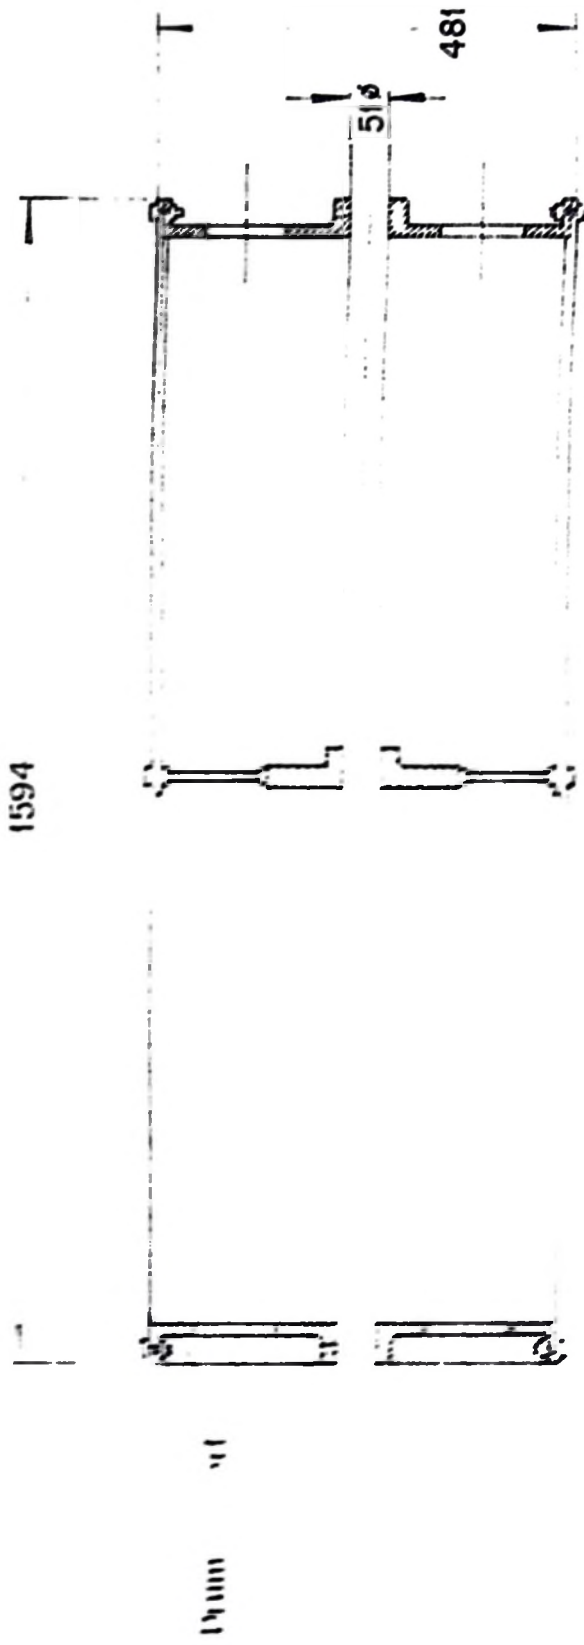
Cross-section of the threshing cylinder assembly without pegs, knives and straw thrower.
